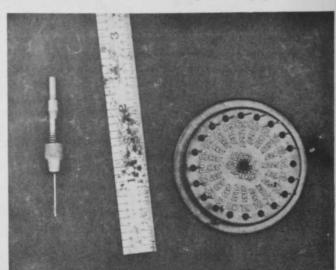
Drill set (No. 61 to No. 80) and special chuck needed for drilling plastic pipe. The chuck is part of the drill set.
